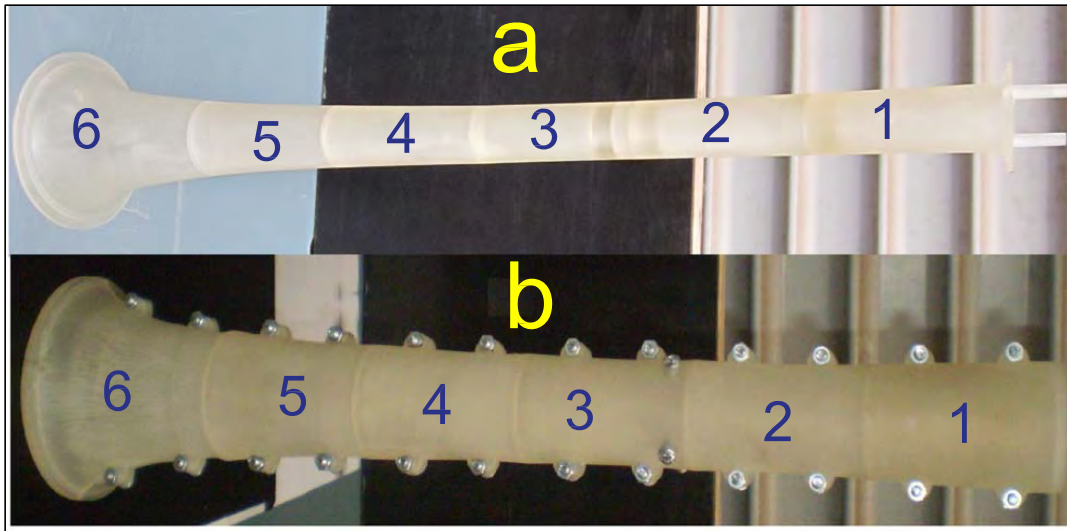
Photograph of the assembled parts used to create the mould to cast the transparent duct: a. inner part b. outer part.
